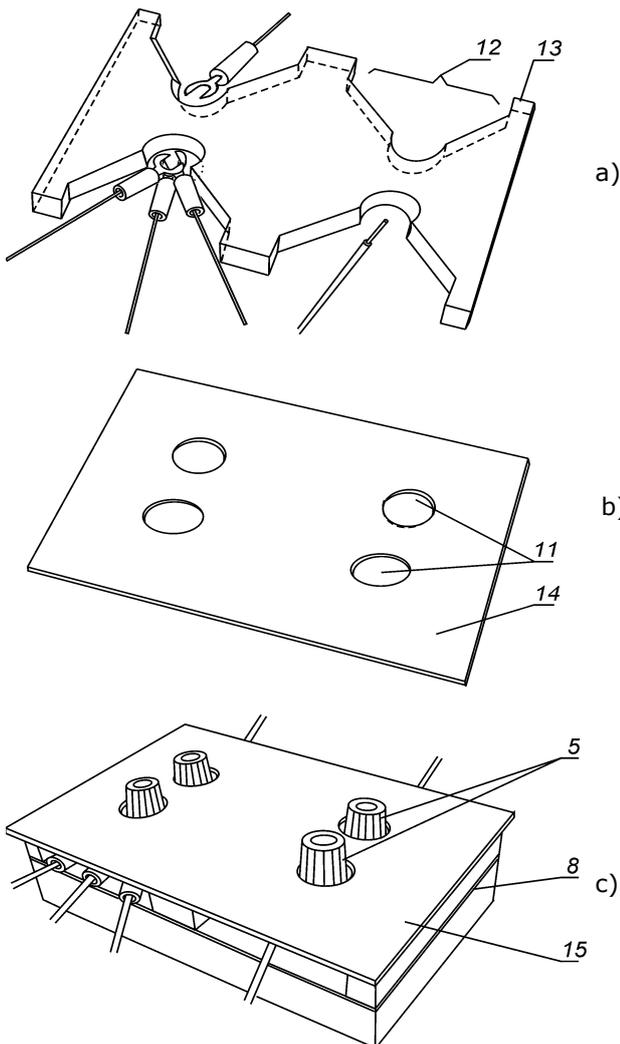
The set of the screw terminals: thicker plate (a), thinner plate (b), cover (c)
